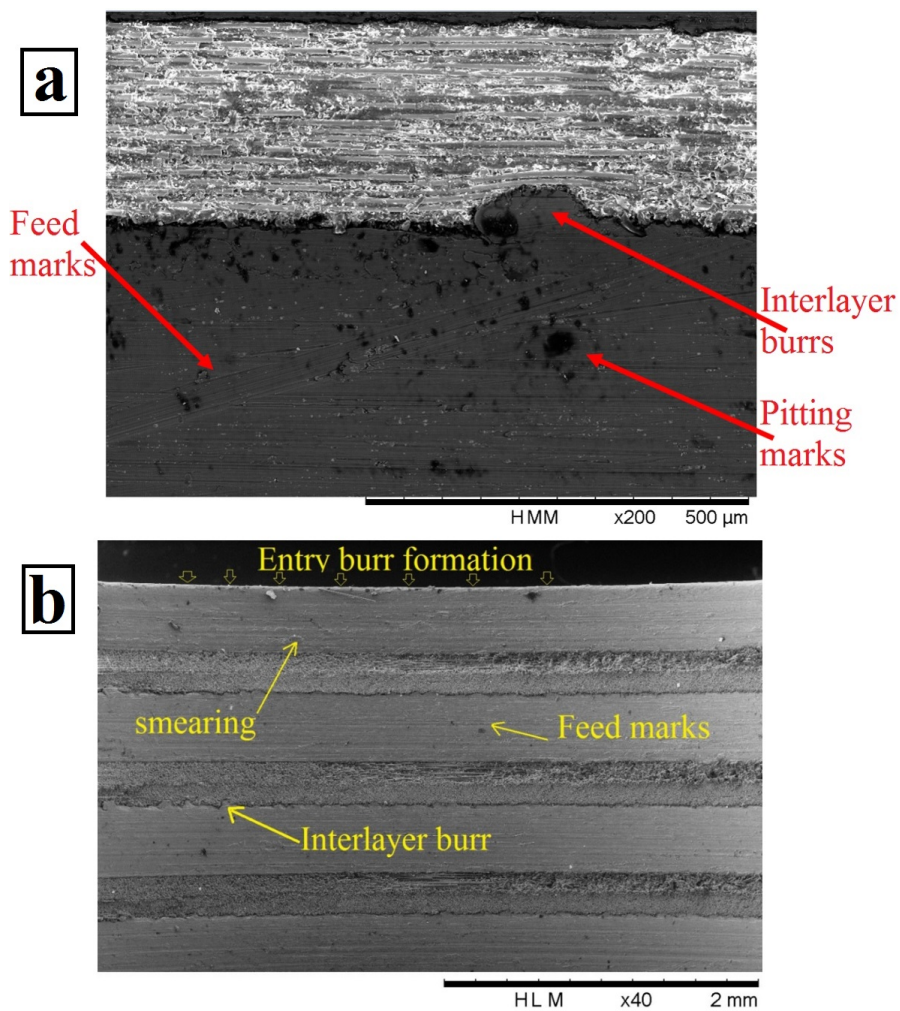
SEM image showing (a) interlayer burr formations of hole in GLARE 2B 8/7 drilled at 1000 rpm and 300 mm/min (b) entry burr formations of hole in GLARE 3 8/7 drilled at 3000 rpm and 300 mm/min
